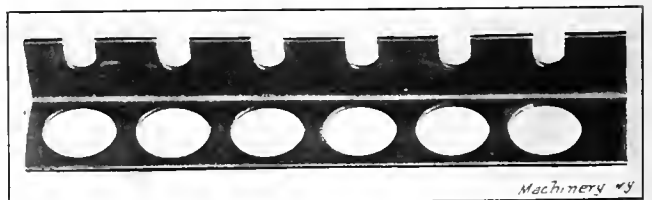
View showing the Condition of the Angular Strip after Piercing
